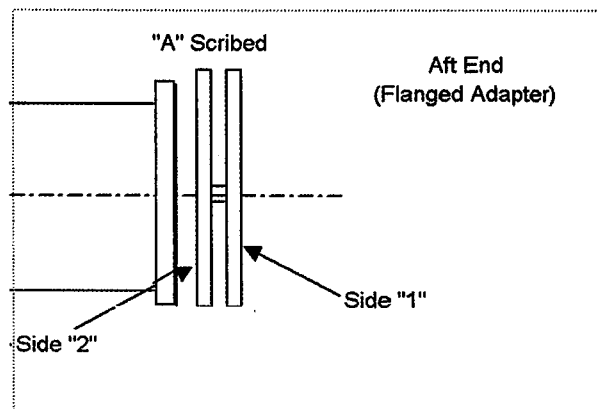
Aft End Bolt Layout for Sub Assembly Balance
